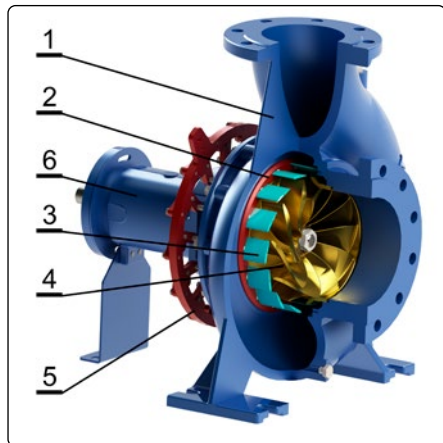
Miniturbine THVf (1 – pump casing acc. to EN 733, 2 – stay ring, 3 – wicket gate, 4 – Francis runner, 5 – Gate operation ring, 6 – standard bearings housing)
